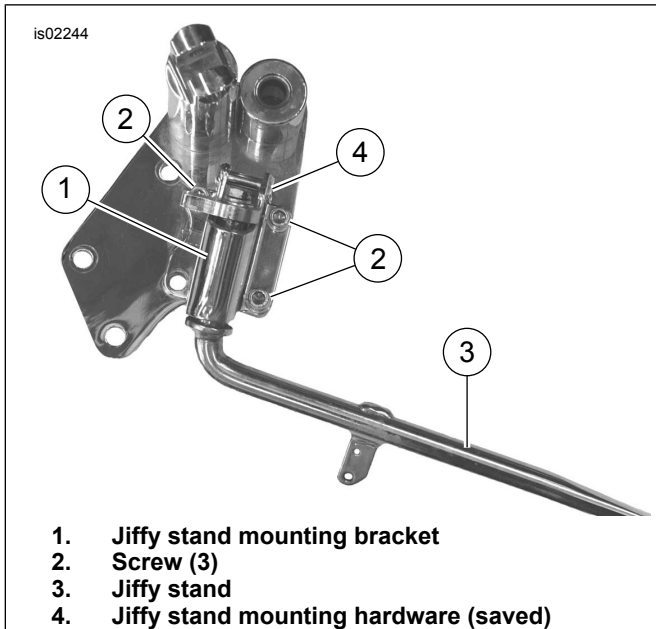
Install Jiffy Stand Mounting Bracket and Stand to Shifter Mounting Plate
